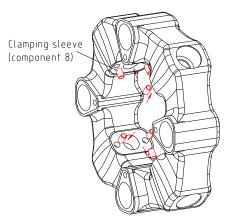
Type EP - Assembly of clamping sleeves (component 8)
